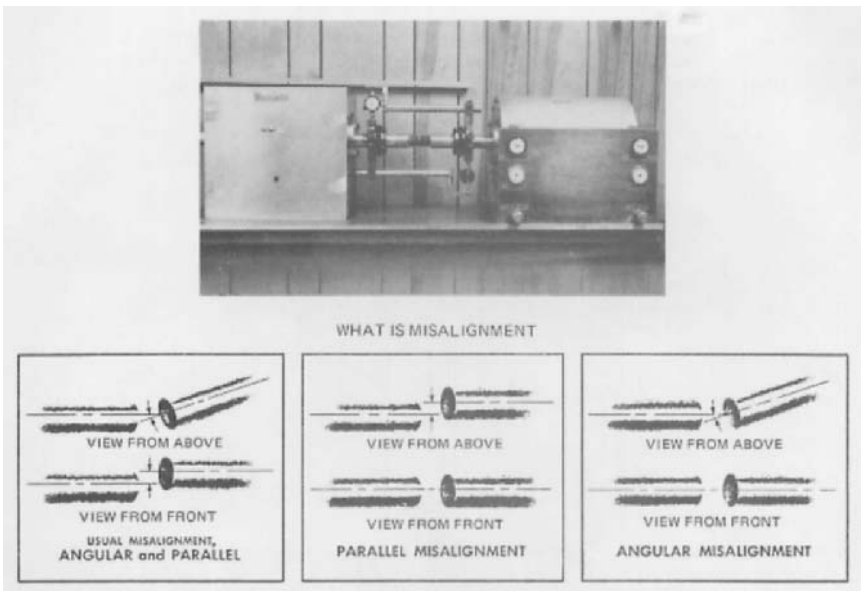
Model used for training machinist in the use of reverse dial indicator technique for alignment of machine shafts. Misalignment can be measured as parallel or angular offset.
